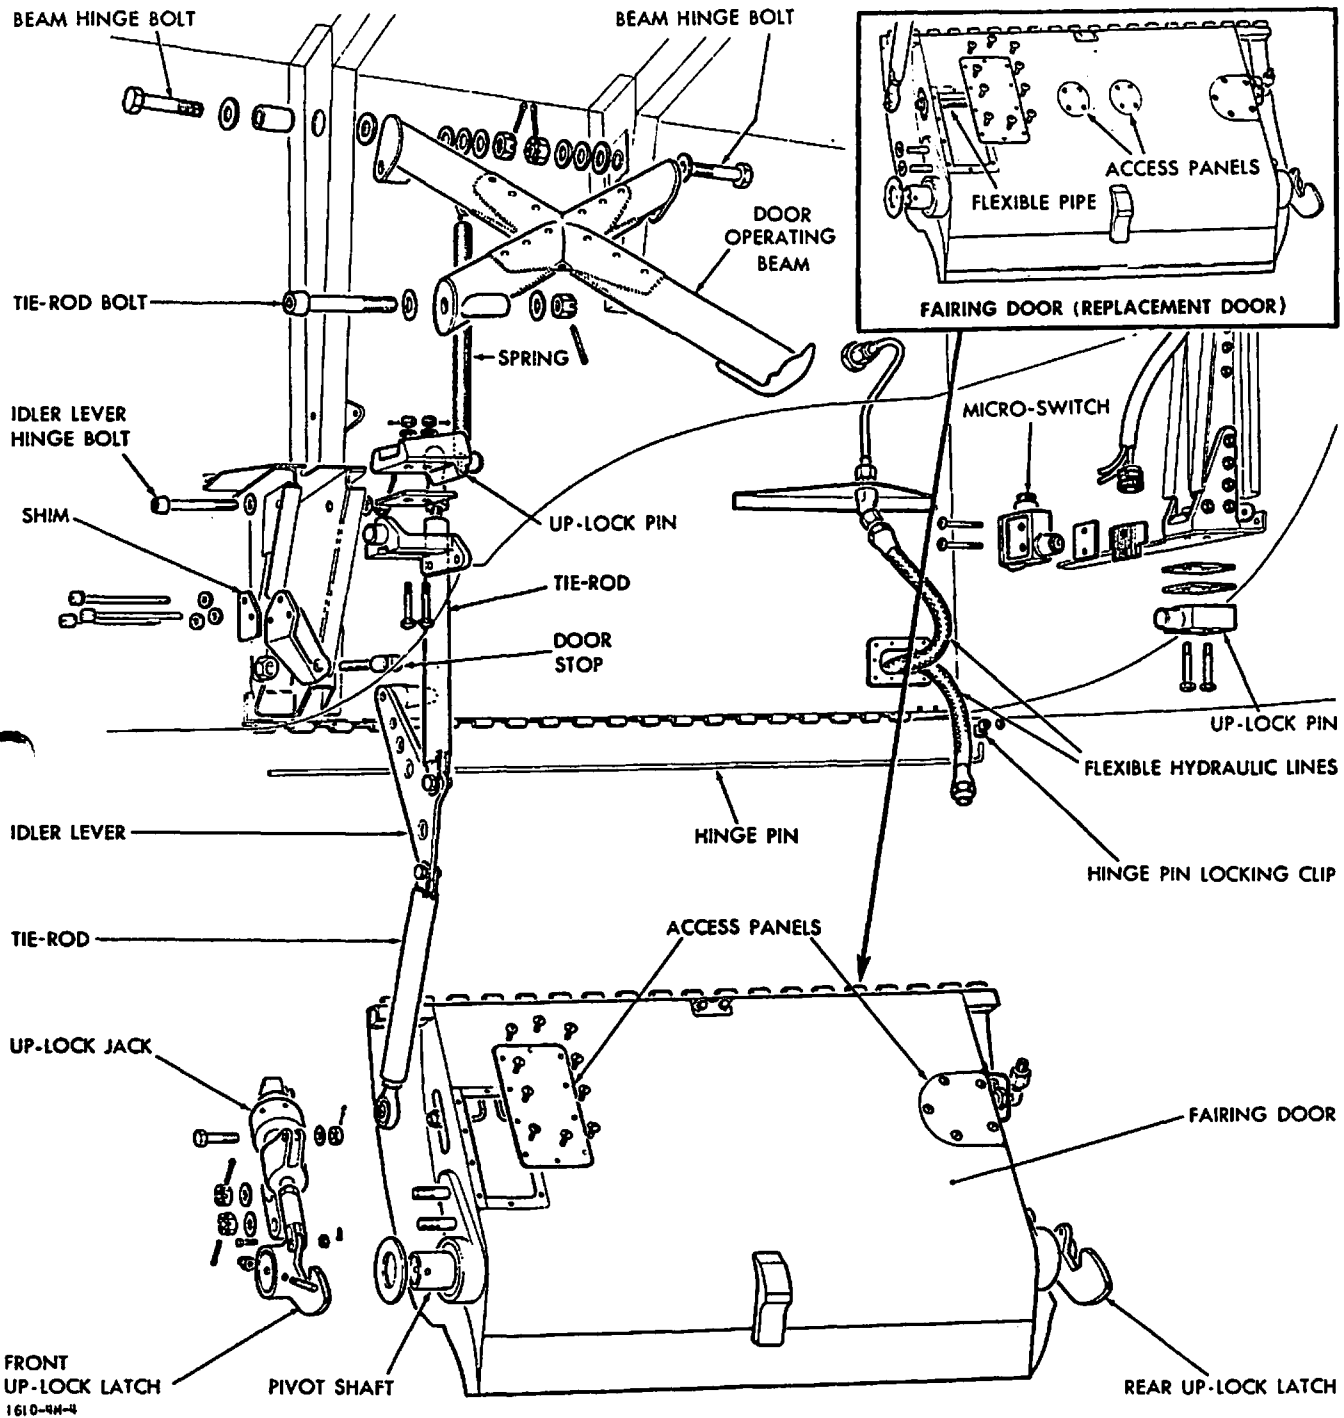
Main Landing Gear Fairing Door Removal
